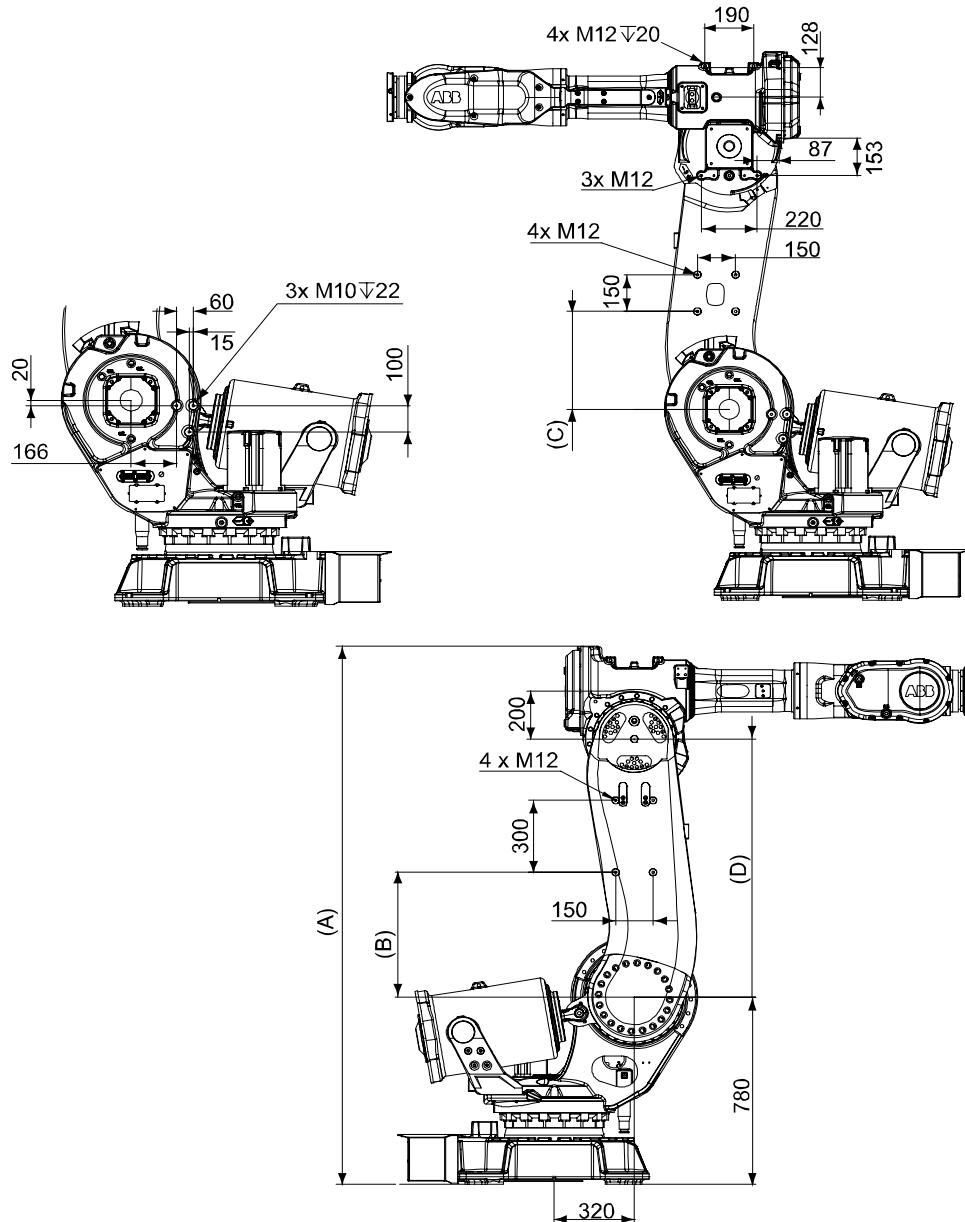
Holes for mounting extra equipment on the upper and the lower arm, and the frame on IRB 6640 (dimensions in mm).
